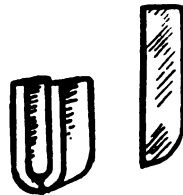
TWO PARTS USED IN MAKING THE HINGE
